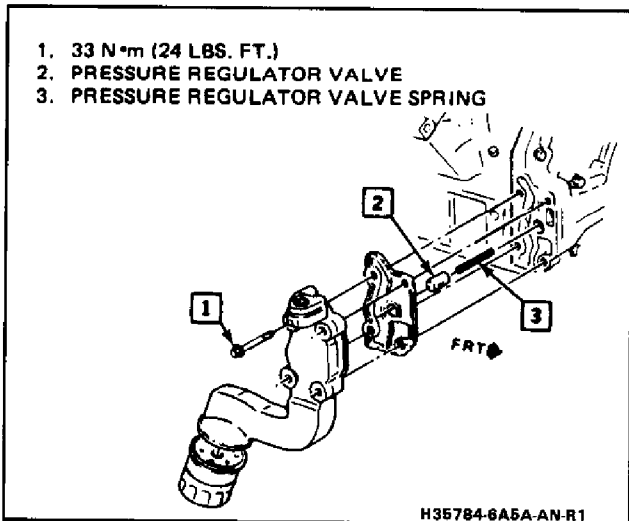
Oil Filter Adapter & Oil Pressure Valve-E Carline
